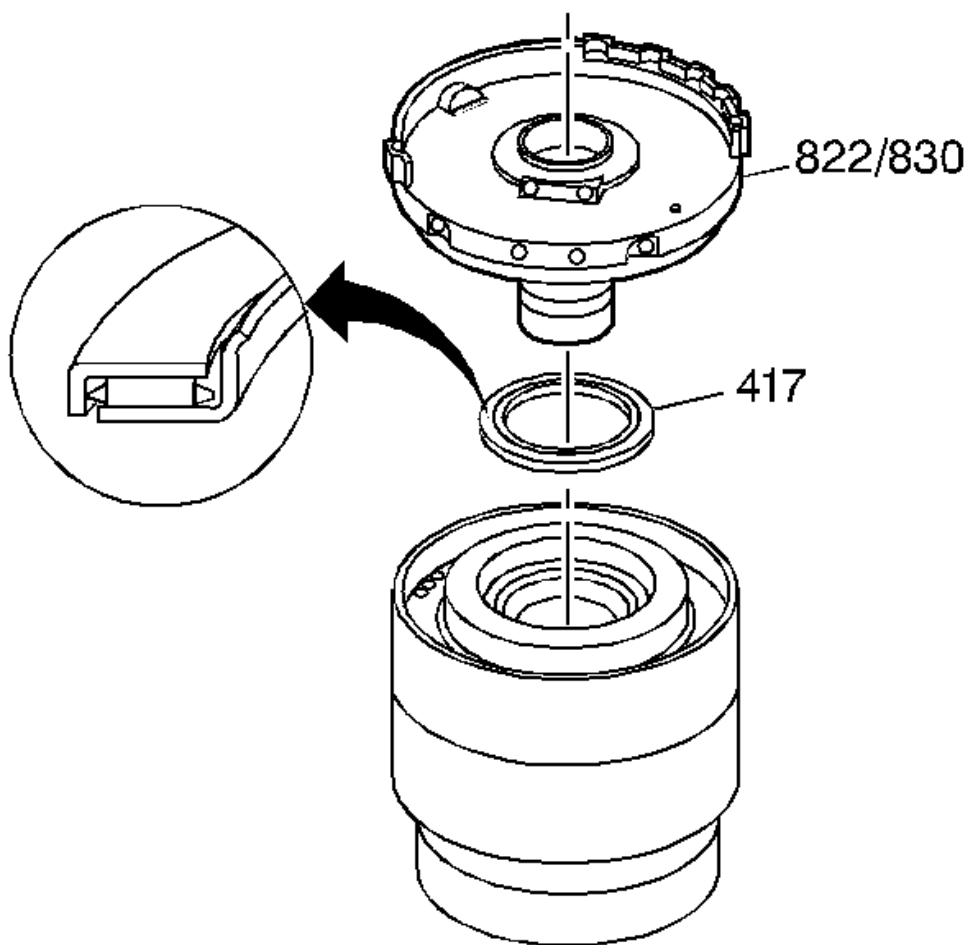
Forward & Coast Clutch Assembly & Thrust Bearing
